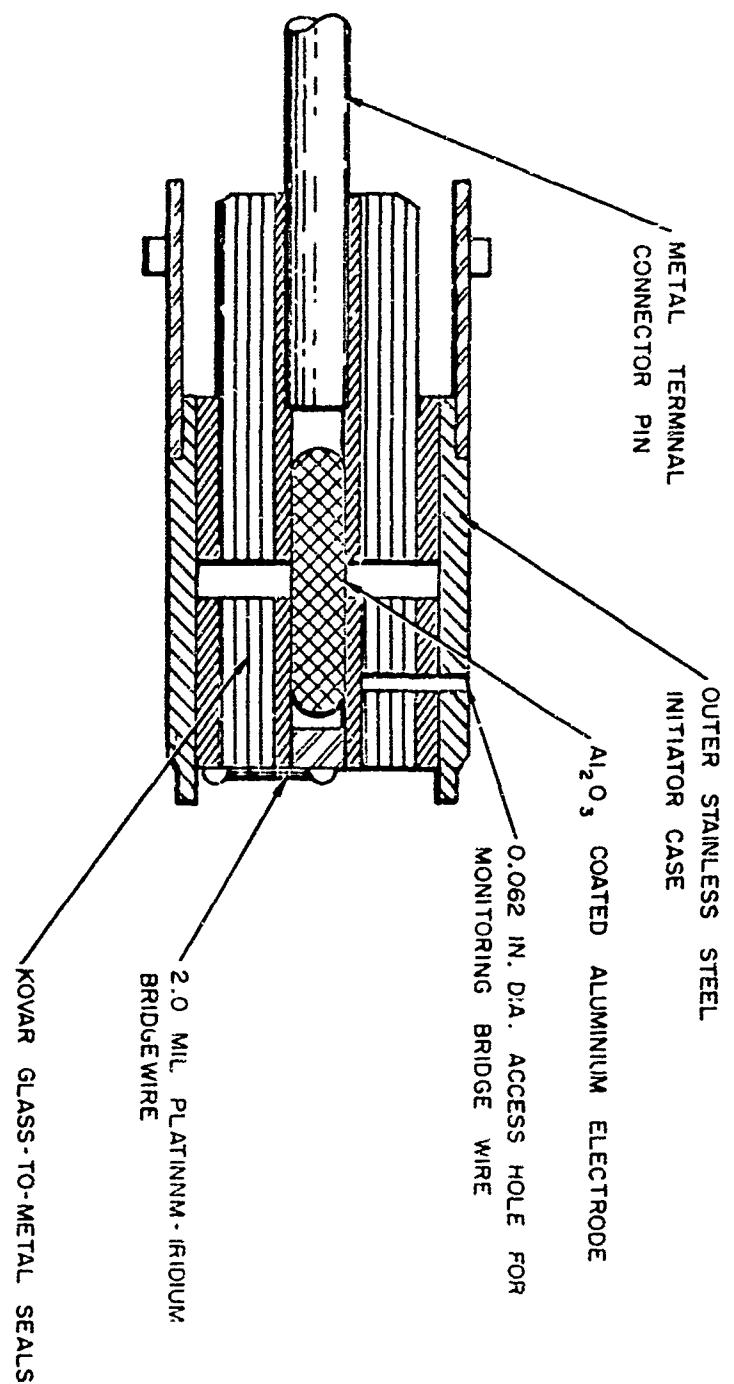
Final Design, Prototype SOVS Initiator Assembly.
